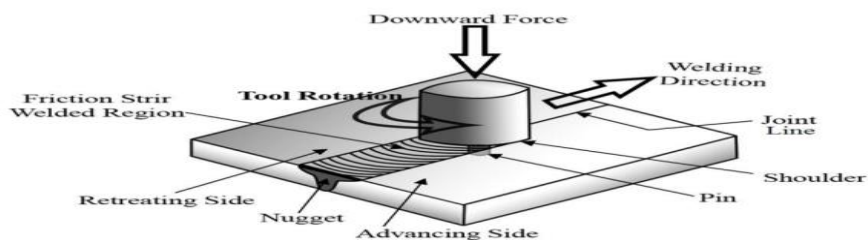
Schematic Diagram of Friction Stir Welding Process
